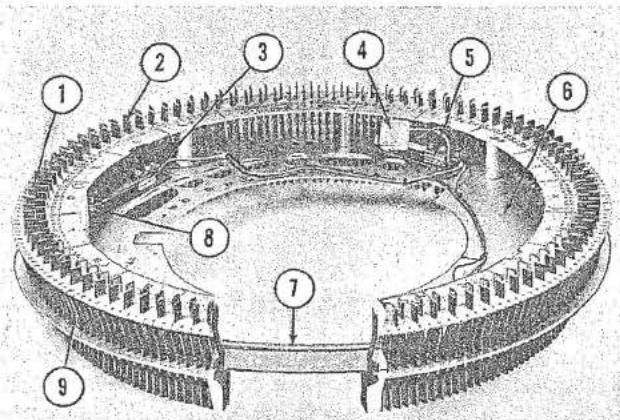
SELECTOR PLATE AND LATCH PIN ASSEMBLY, 2400
